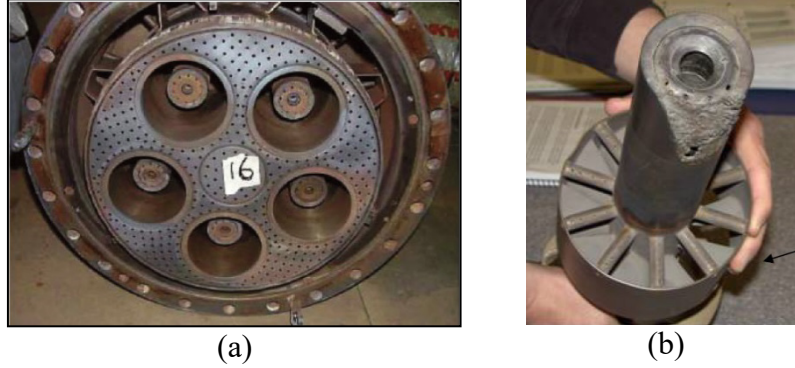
Internals of a premix burner design. (a) Combustion chamber with five individual premix sections. (b) Damage to the central fuel tube due to flashback.
